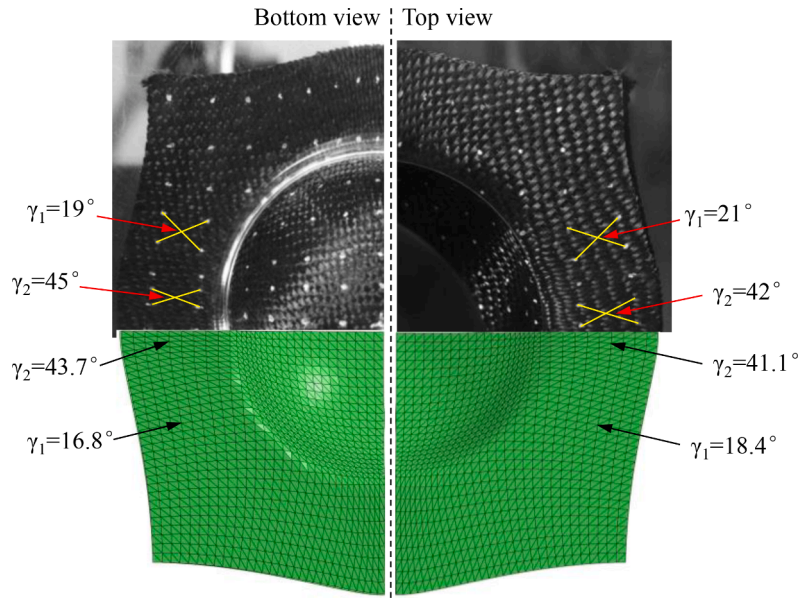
Experimental and numerical results of the shear angle in hemispherical forming of a four-layer $\pm 45^\circ$ fabric. The upper part of the figure shows the experimental results: left-hand image is given by the bottom camera (bottom view), and right-hand image is given by the top camera (top view). The lower part of the figure gives the corresponding numerical results on top and bottom layers. Shear angle γ is compared at two different positions.
